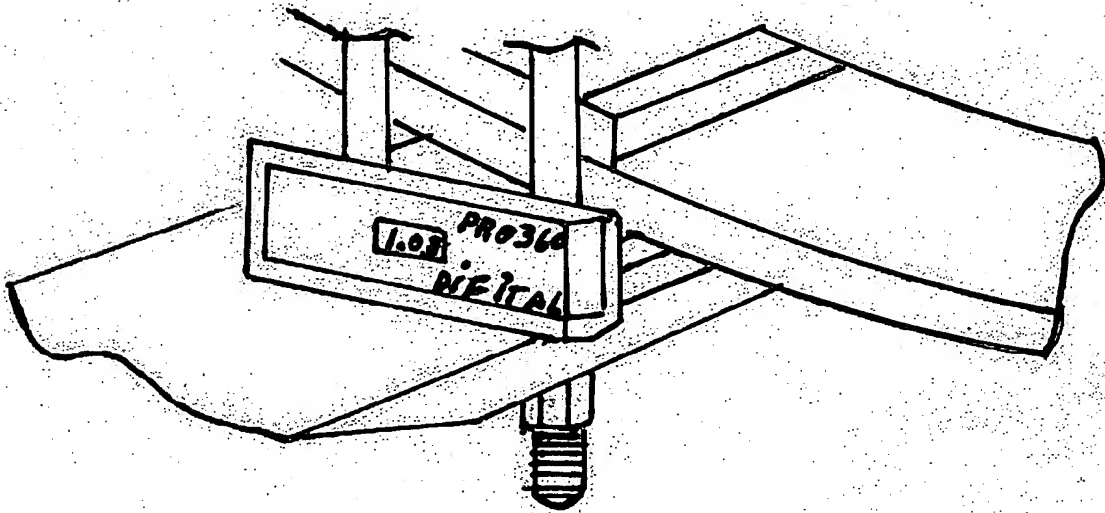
CHECKING SPRING BUSHING TO "U" BOLT
